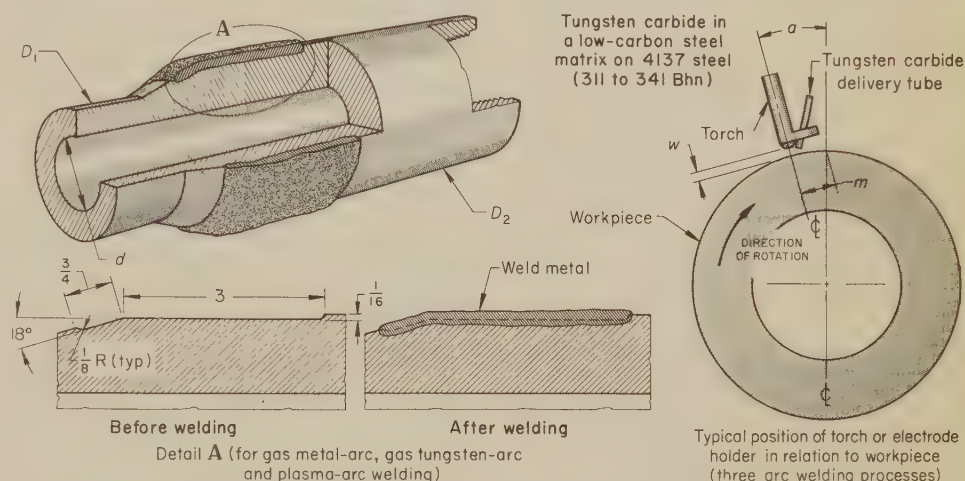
Tool joint for oil-well drilling, showing the area that was hard faced, and sections through the weld groove before and after welding. Positions of torch or electrode holder and carbide feed tube are shown at the right. Values of  $a$ ,  $m$  and  $w$  were determined by trial and error. See Table 4 for a comparison of data for four welding processes. (Example 162)
